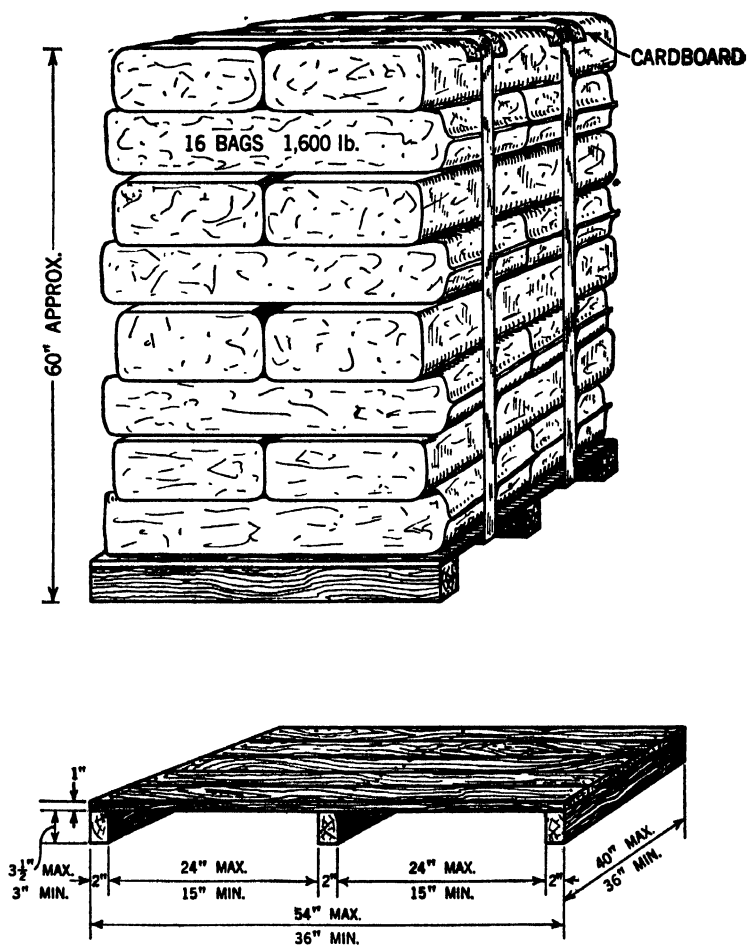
Pallet Designed for Shipment of Bagged Soda Ash (Designed for use with hand pallet lift truck or electric fork truck. Load not to exceed 2,500 lb. Strapping is $\frac{3}{4}$ " band. Corrugated box board corners may be used)
